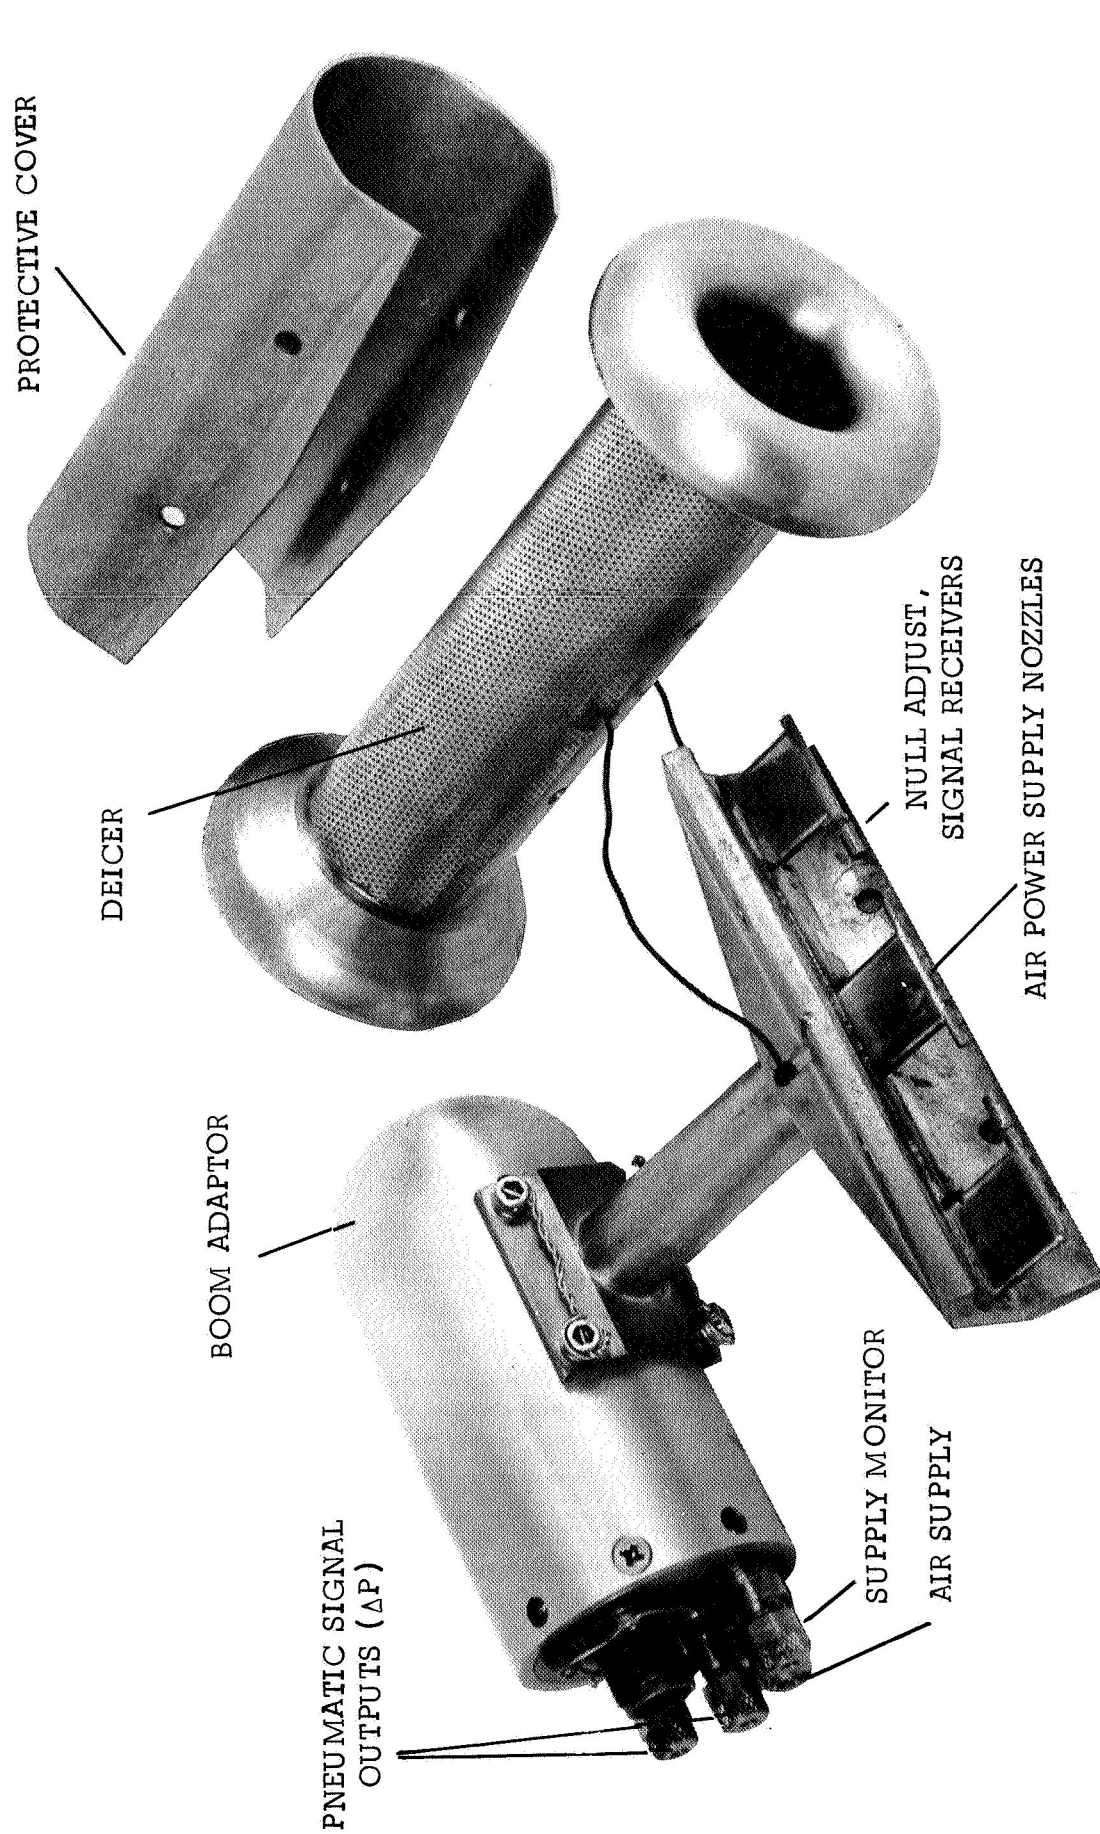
DISASSEMBLED WIND SENSOR PHOTOGRAPH
